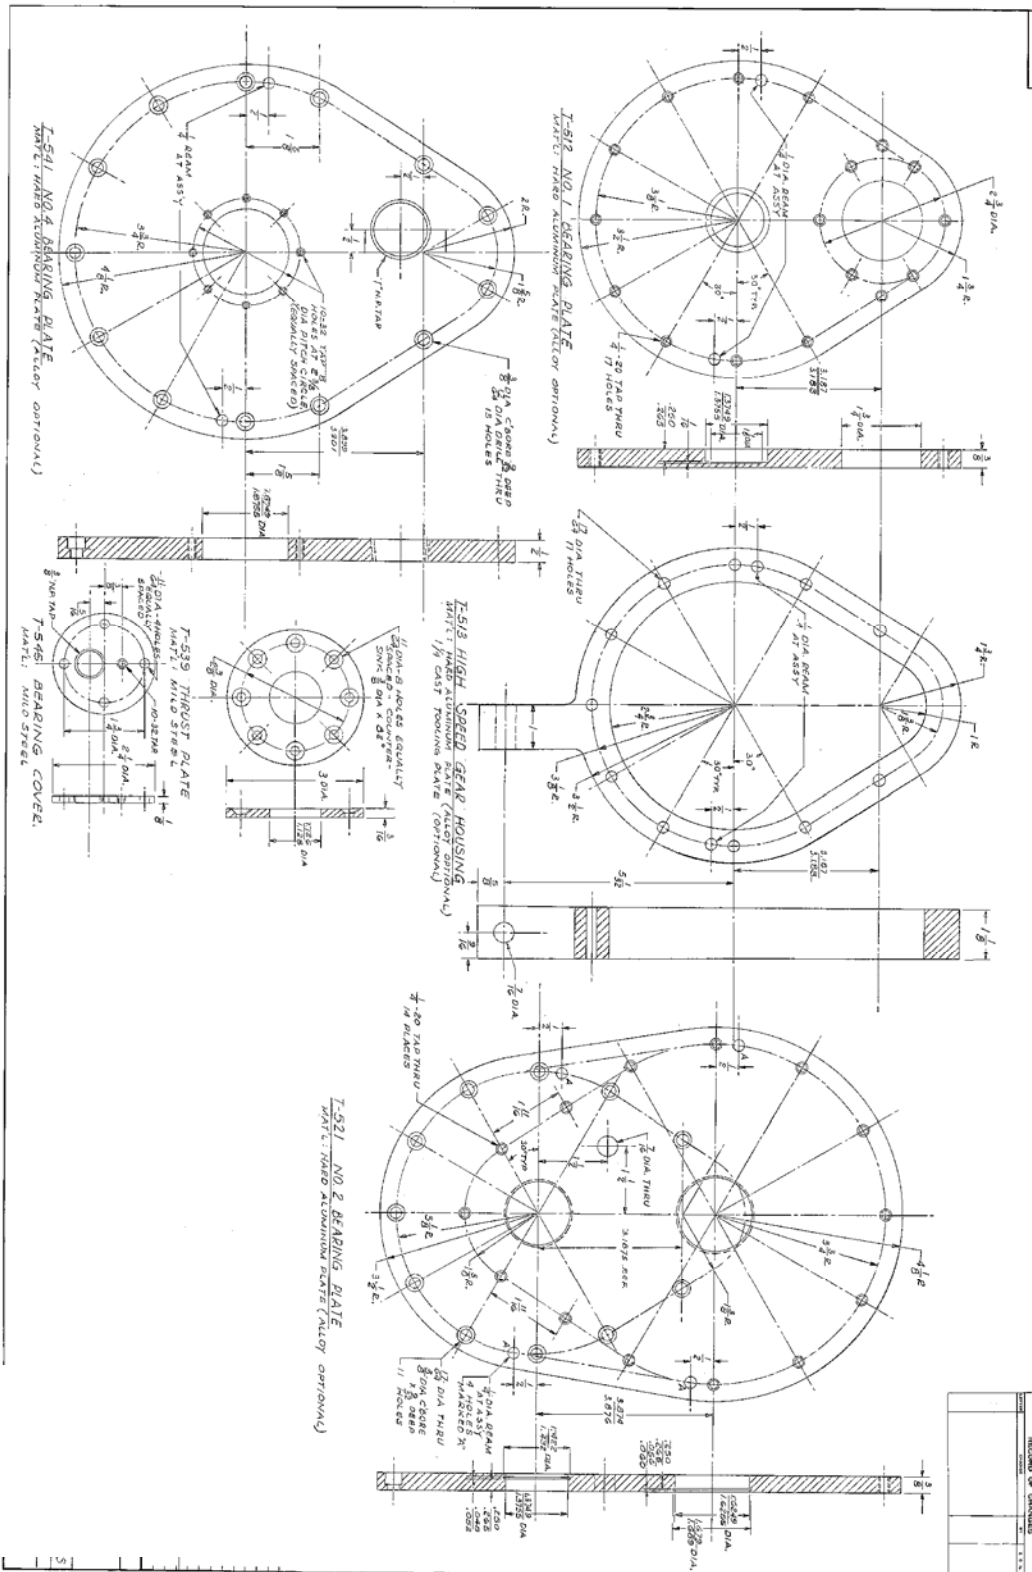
Detailed drawing for first section of gear train; bearing plates one, two, and four, thrust plate, bearing cover, and high speed gear housing.
